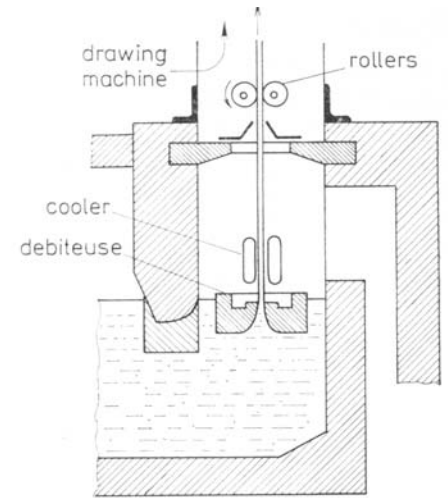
Sectional view of the drawing compartment of the Fourcault drawing machine.
